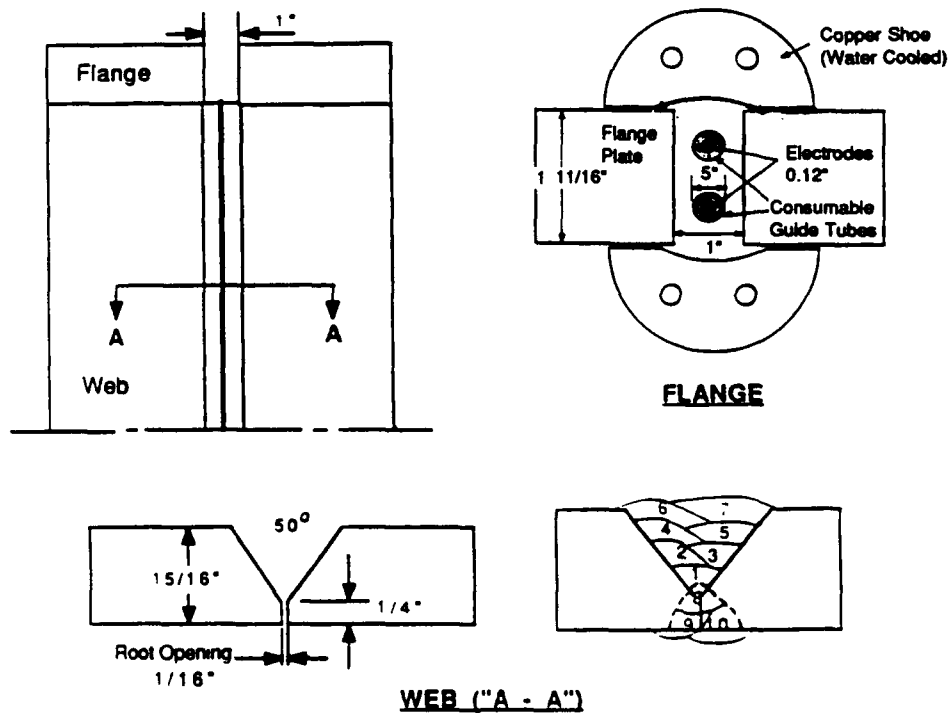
Joint details and welding pass sequences of Test 2
